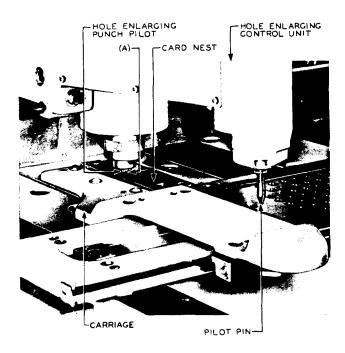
Clearance Between Hole-Enlarging Punch Stripper Retainer and Card Nest
